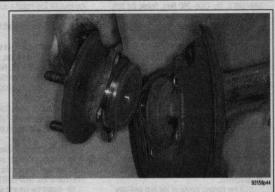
then remove the hub and bearing assembly from the knuckle
